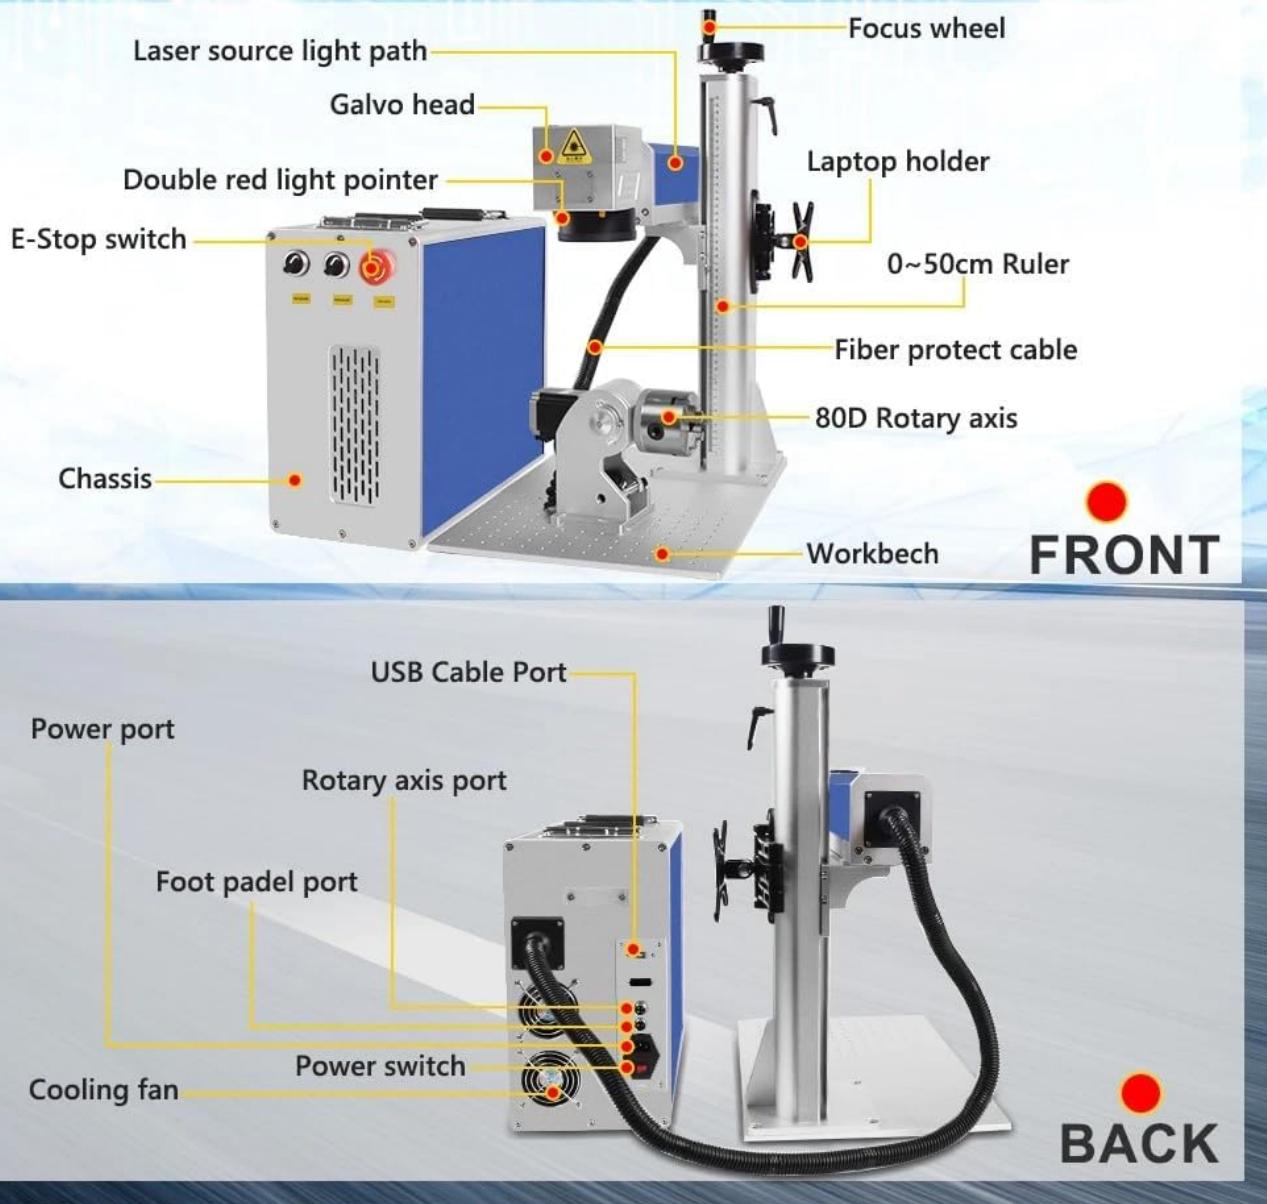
Front and Back View of the Engraver with Labeled Components. This image displays the main parts of the laser engraver, including the laser source light path, galvo head, double red light pointer, E-Stop switch, chassis, focus wheel, laptop holder, 0-50cm ruler, fiber protect cable, 80D Rotary axis, work bench, USB cable port, power port, rotary axis port, foot pedal port, power switch, and cooling fan.
